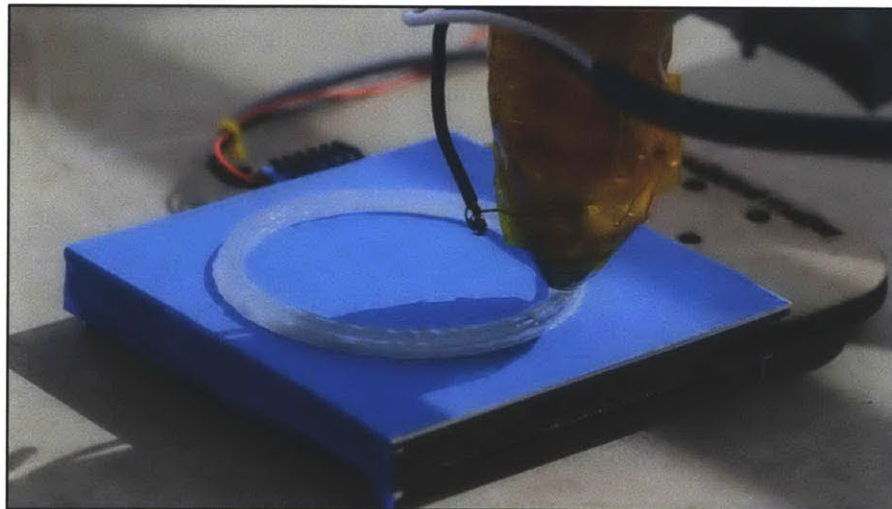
A print test shows the molten HPDE being extruded onto the heated build platform. The layer consistency was affected by the vibration of the auger bit and small pieces of label paper from the milk jugs.
